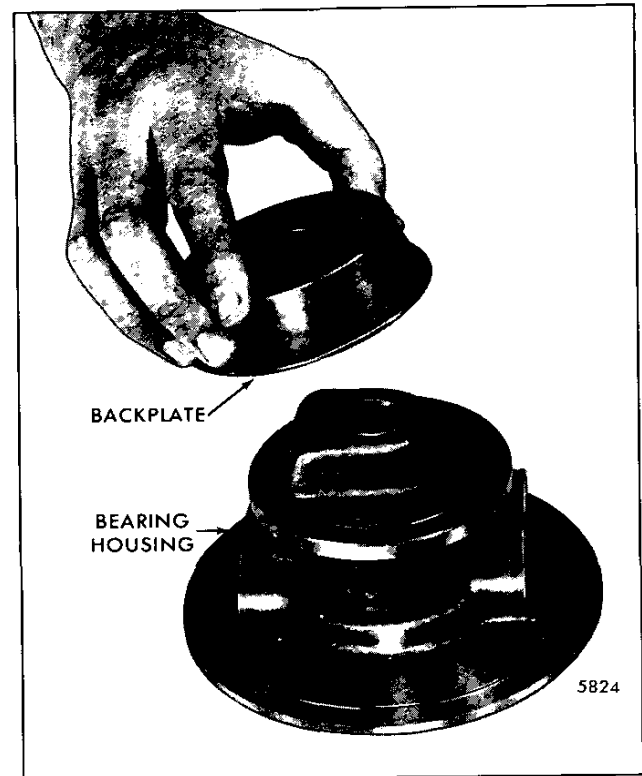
Assembling Bearing Housing, Gasket and Backplate
